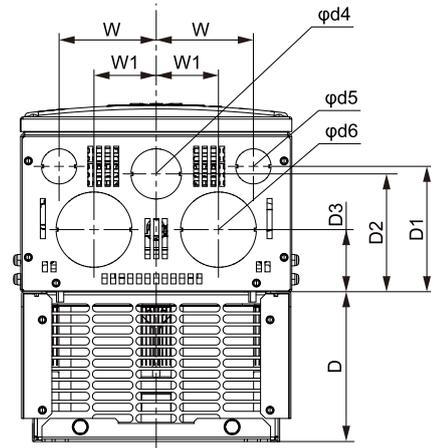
Exterior and Mounting Dimensions Diagram 7 (Models: 2211)
